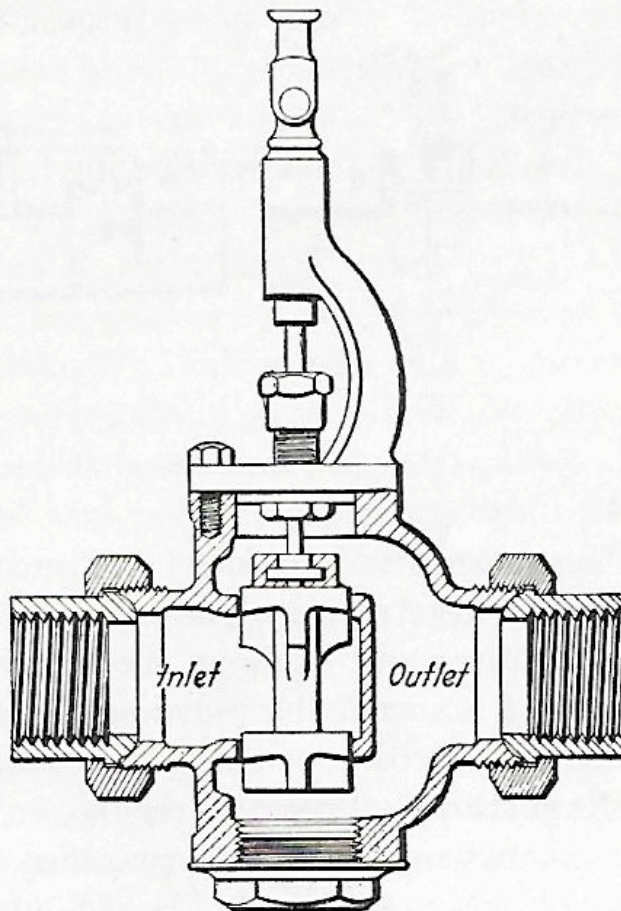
Section through a balanced valve. (Mason Regulator Co.)
